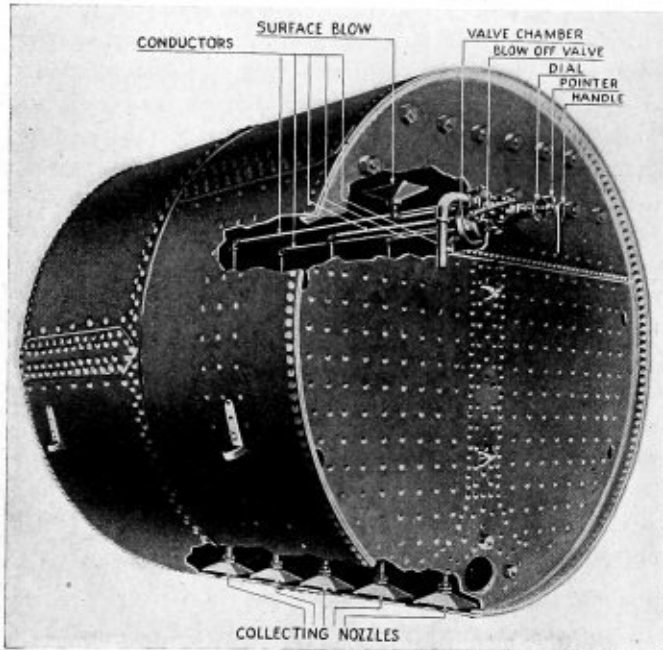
Showing Installation of Geyser System in a Scotch Boiler
